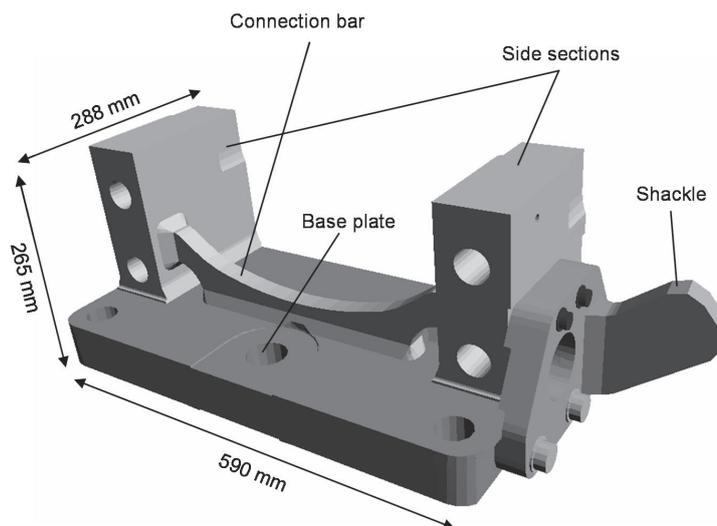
Engine cradle (machined) with base plate, side sections left/right, each with two through-holes as well as welded brace and right shackle which is screwed on
